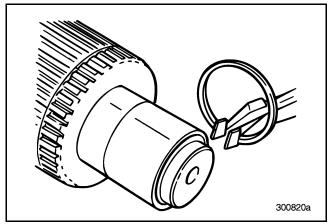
Removing Rear Spigot Bearing Inner Race Snap Ring (T313L/T318L Shown)
